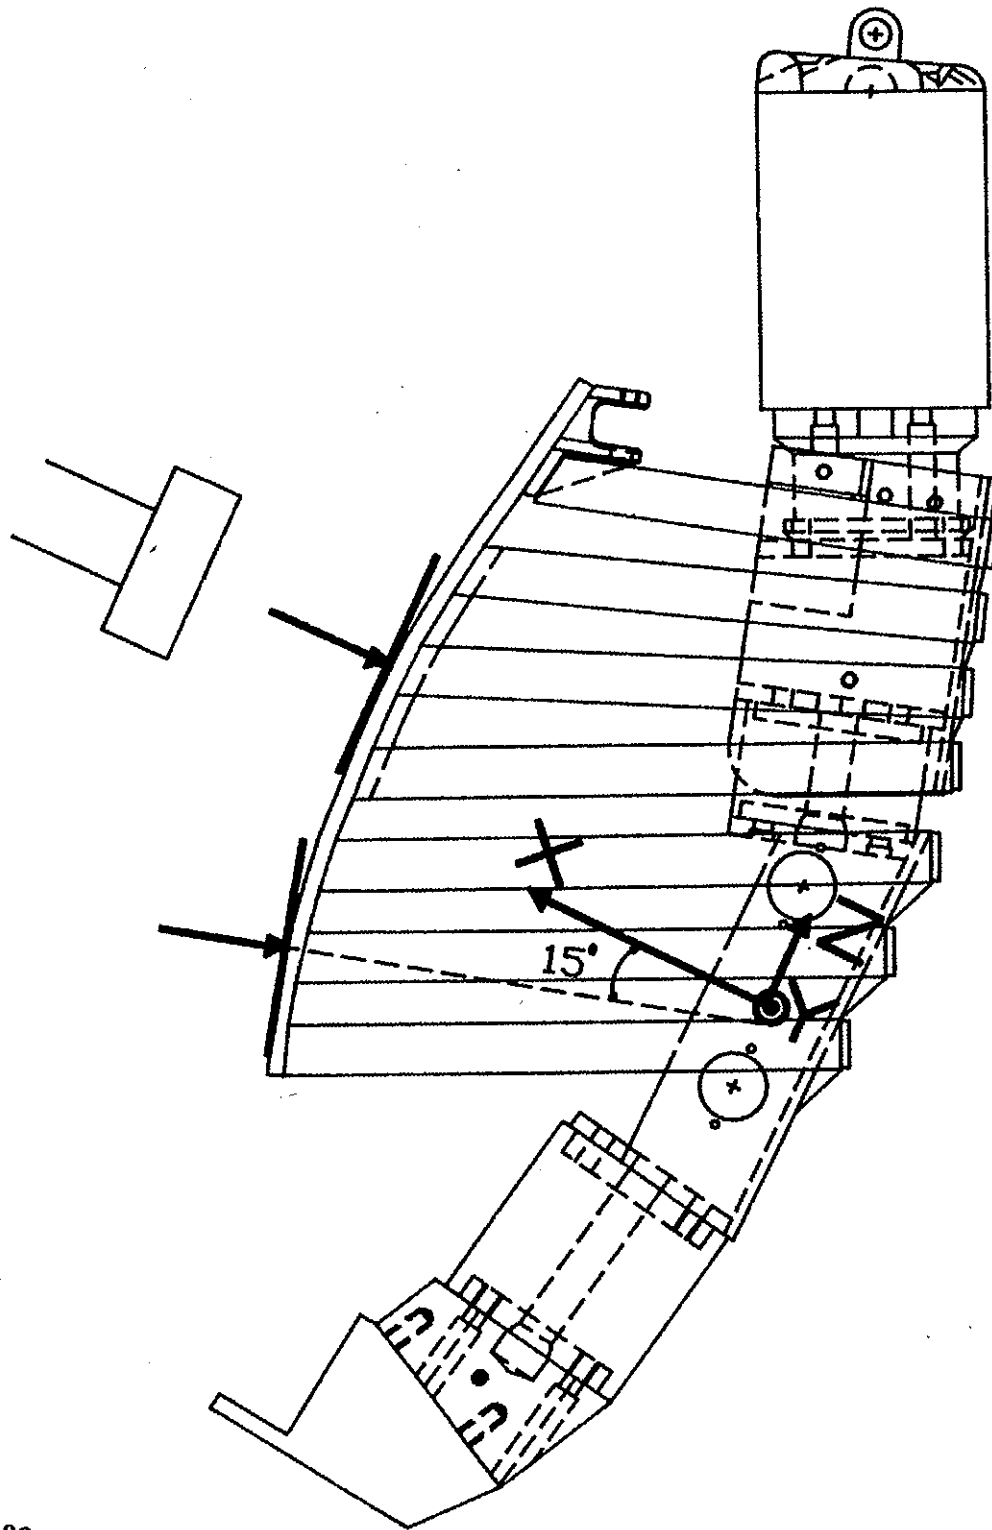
Side-view drawing of Second Prototype-50M assembly showing lower thoracic spine coordinate system and direction of sternal and lower ribcage compression axes.
